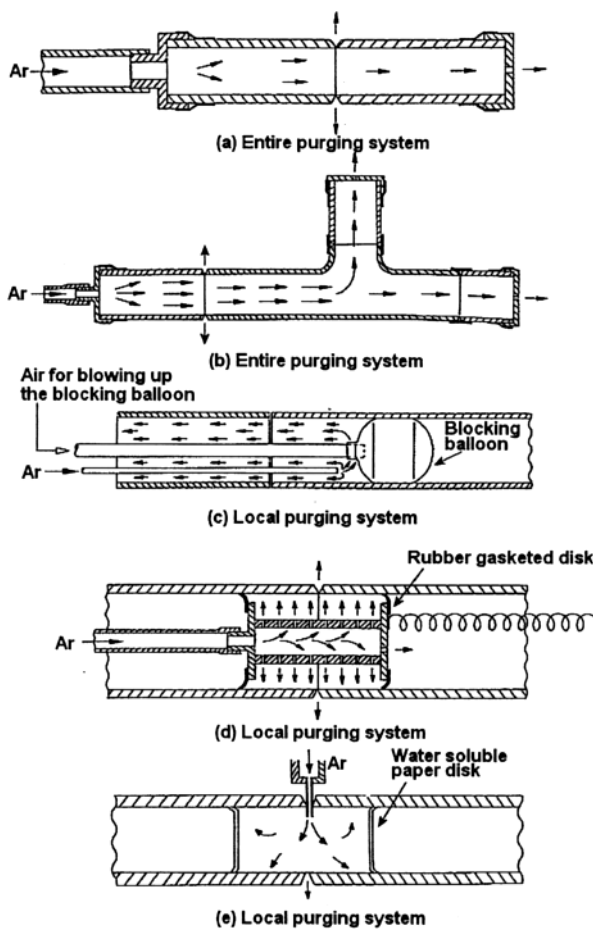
Typical gas purging systems for back shielding the root pass weld in piping
